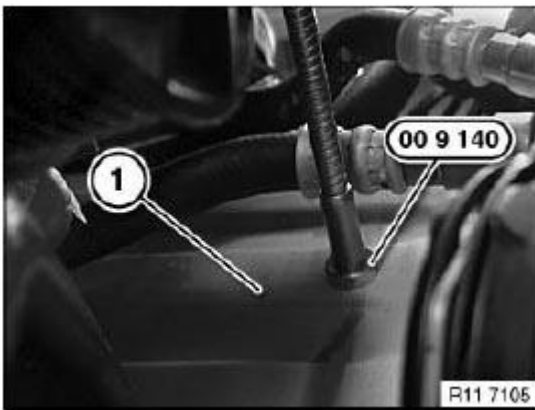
Identifying Special Tool 00 9 140 And Engine Carrier
